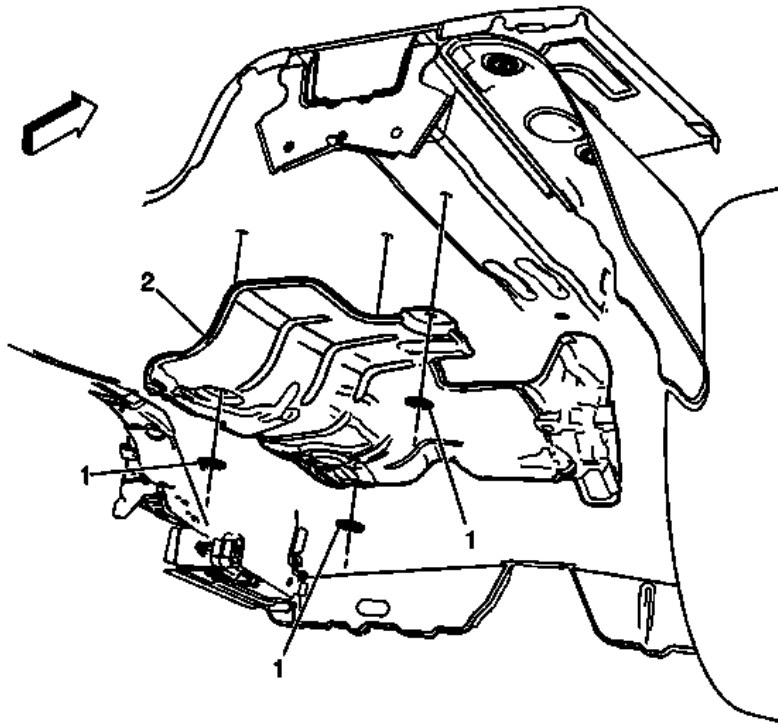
Exhaust Rear Muffler Heat Shield (Right Rear Inner)
